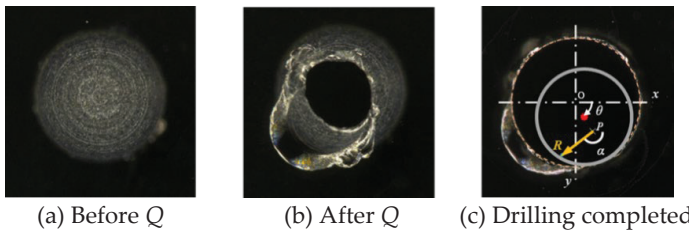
Appearance of drilled hole during tool penetration from the outlet side view
